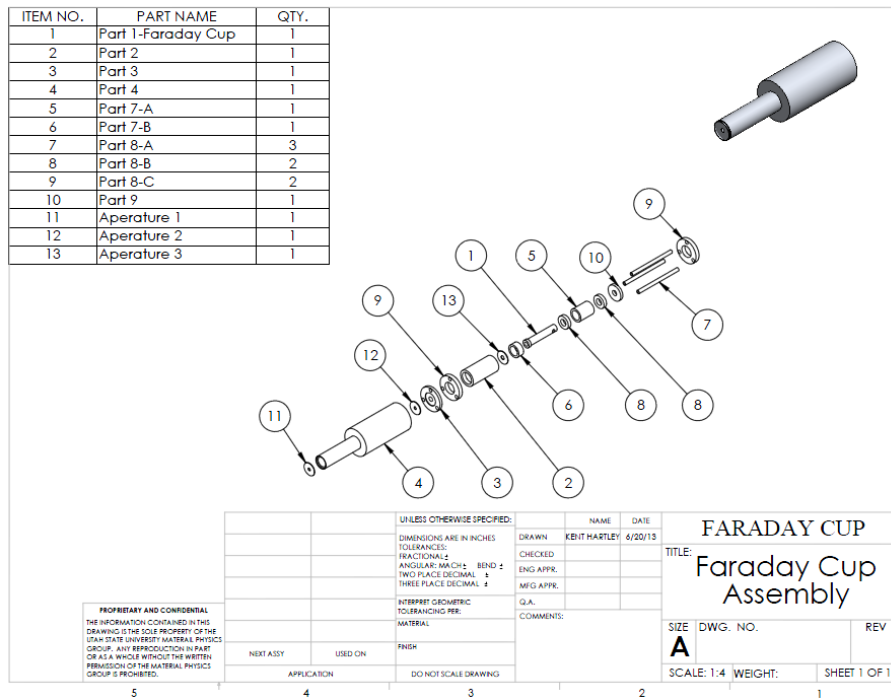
Sample of the drawings created for the current Faraday cup. This drawing shows an exploded view of the Faraday cup assembly.
